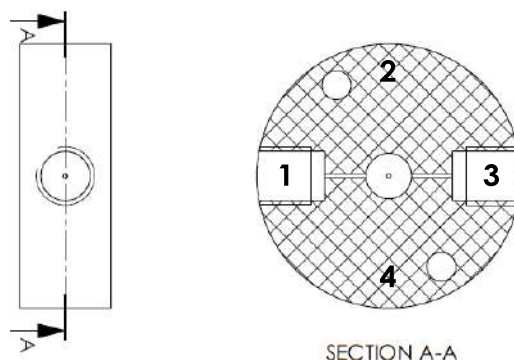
Section view of the PCTFE valve seat with port numbering - VO1-2
